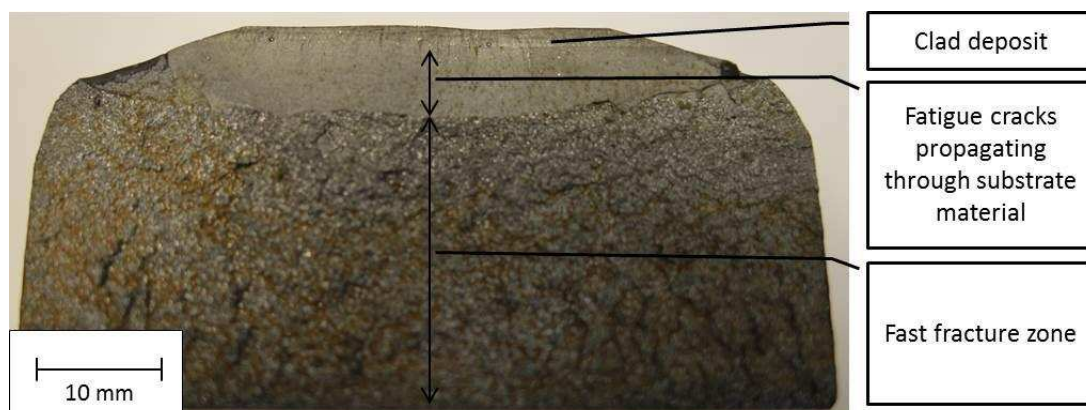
Section view of ST6 – 350 sample after failure at 61,000 cycles.
